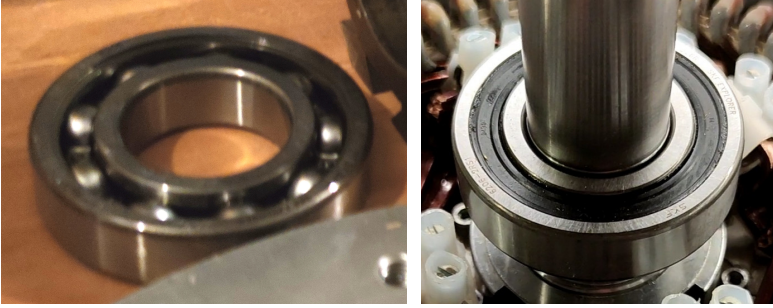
Photo of the bearings. To the left: Hot side bearings without sealing. To the right: Cool side bearings with sealing.
